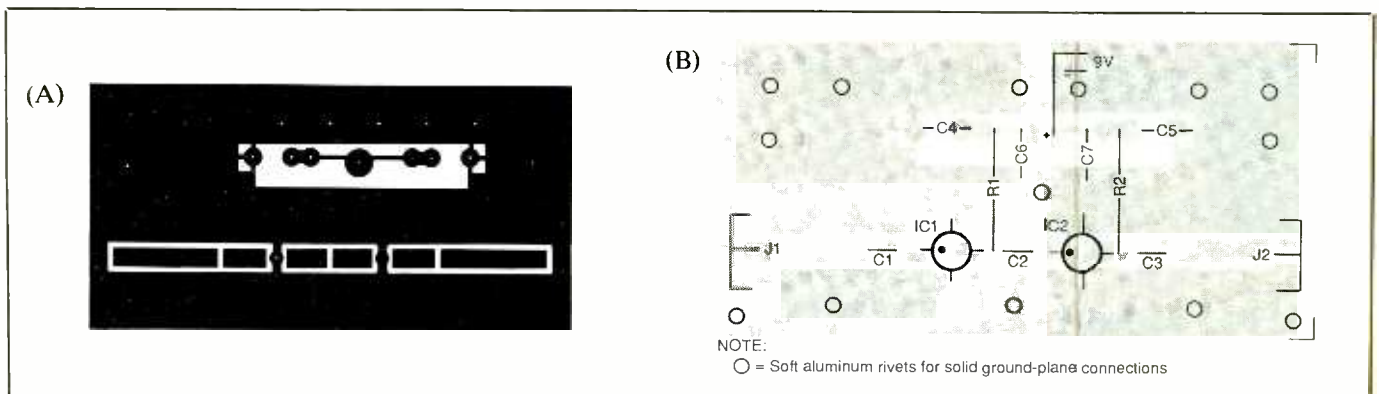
Actual-size etching-and-drilling guide for fabricating printed-circuit board (A) and wiring details for board (B). Note that, ICs are surface-mount devices, as are leadless-chip capacitors.
